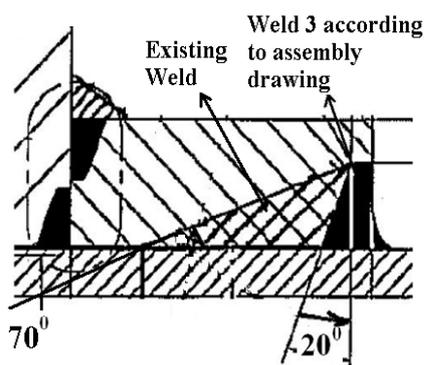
Incorrect weld groove of weld seam 3
